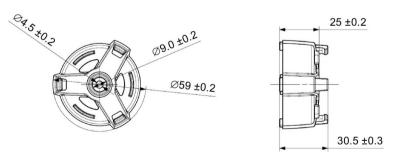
Dimension drawing of spacer 6GT2690-0AL00
